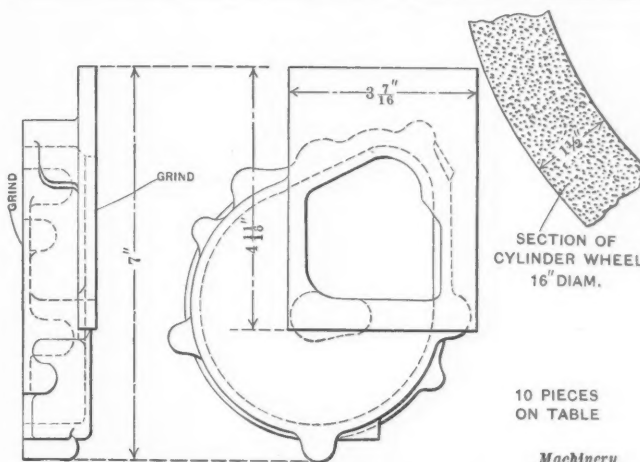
Data on grinding of Gear Housings shown in Fig. 15
